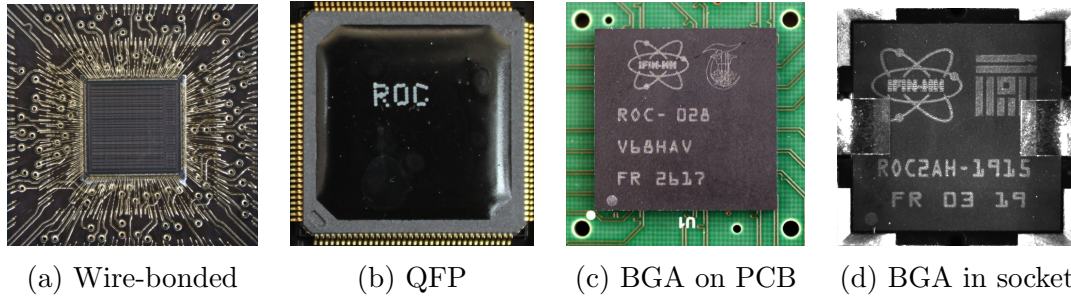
A ROC die wire bonded on a prototype testing PCB (a), the intermediate QFP 144 package (b) and the final 16×16 BGA package soldered on a testing PCB (c) and in an open-top socket (d).
